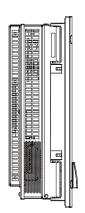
Dimension drawing of the touch screen device with 12" display and expansion frame
